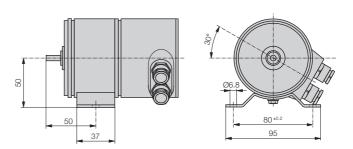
Fixing with mounting foot. (If the cable glands are in the way when mounted as above, the KINAX WT 710 should be rotated over 120°, after loosening the 3 screws holding the gear).
